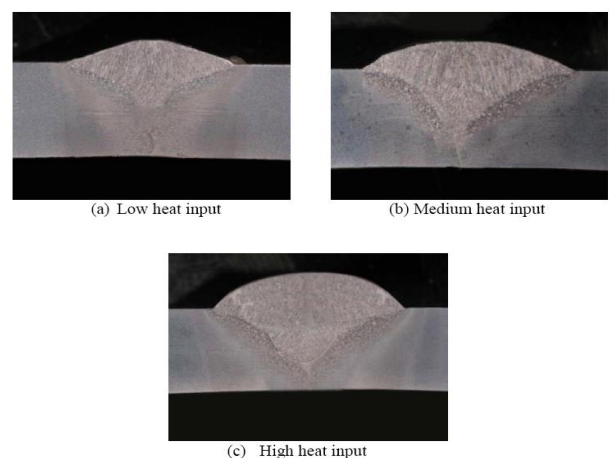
Macrograph of weld specimen at the different heat input.
